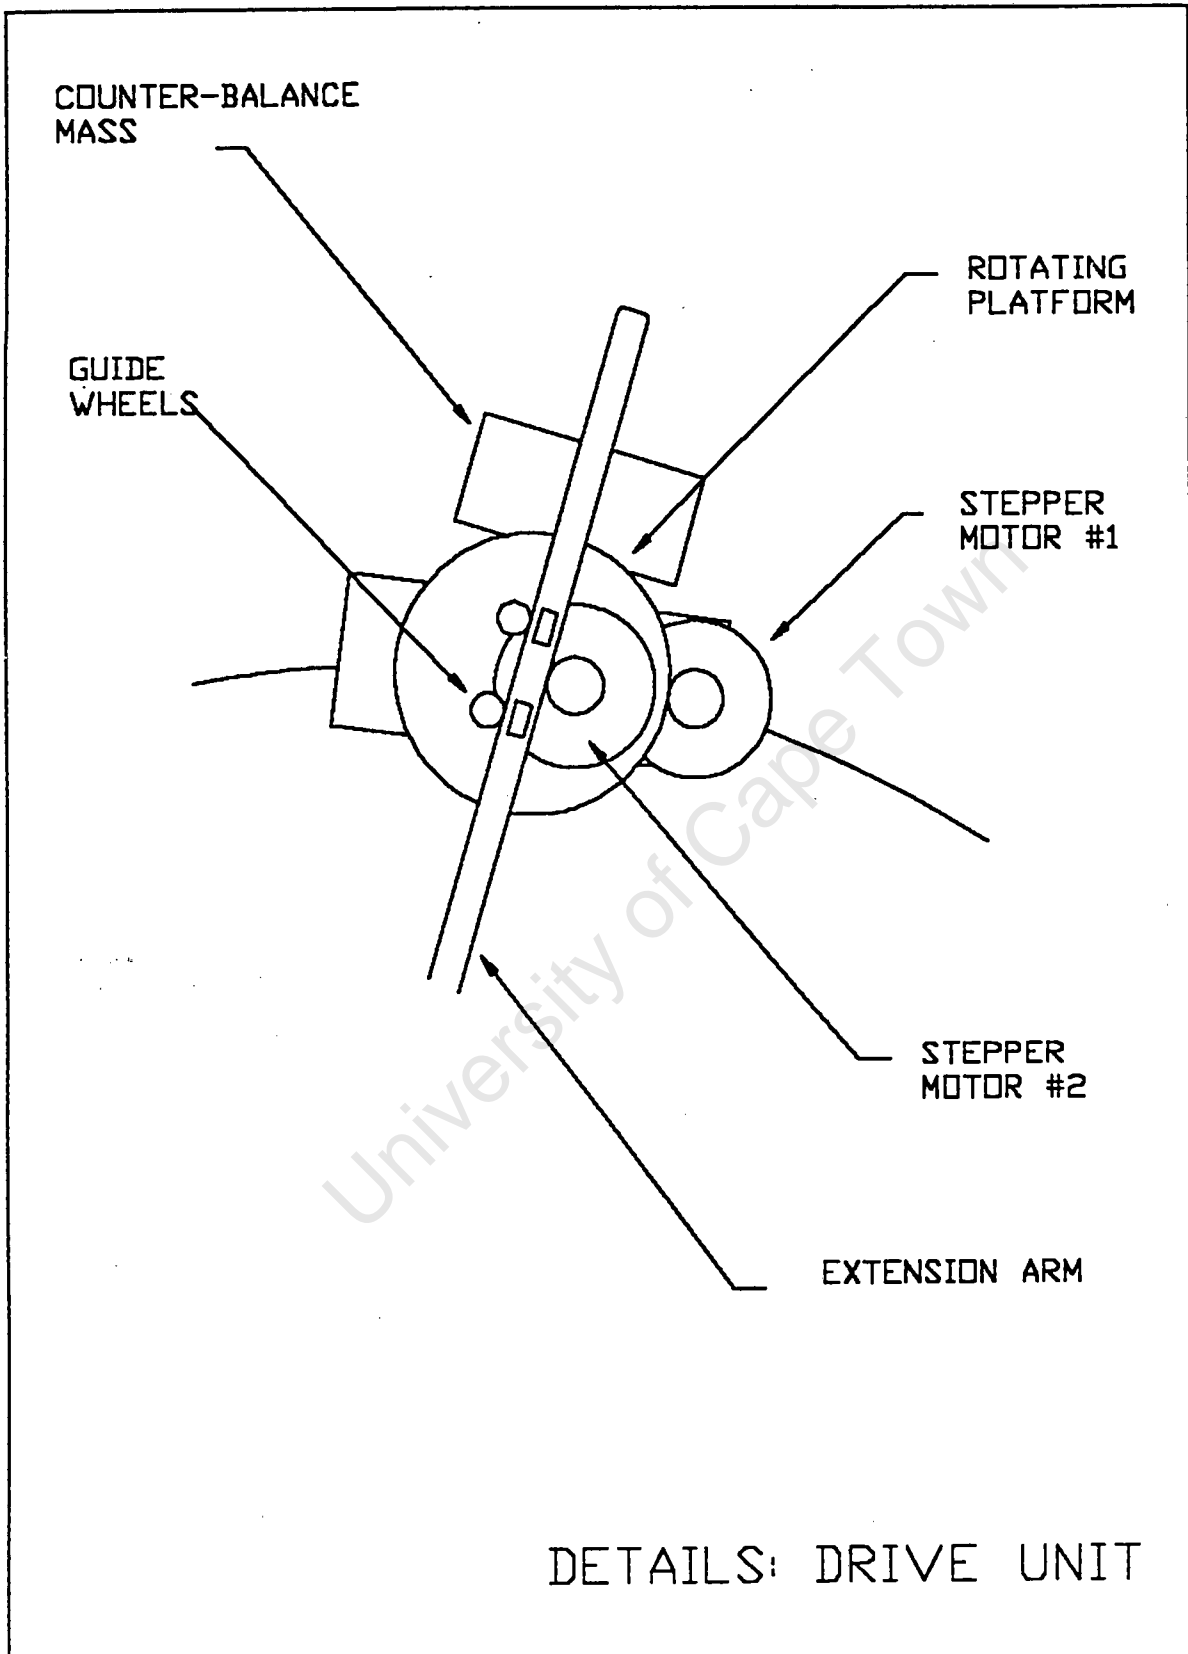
(b) "Single position" frame design #2, details of drive unit
